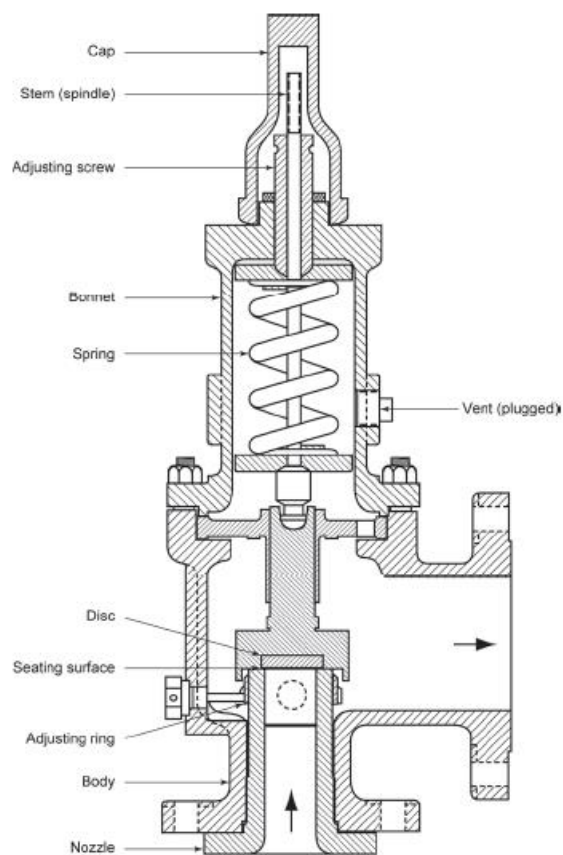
Conventional PRV with a single adjusting ring for blowdown control. (Taken from API 520, Part 1, 2020)
